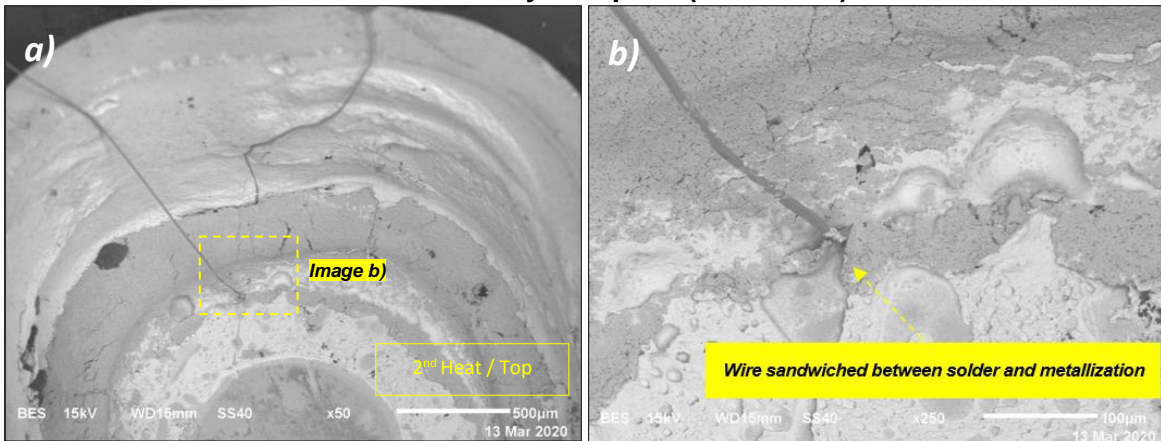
Solder Joint Condition of Metallized Body Fuses (SEM Photos)
